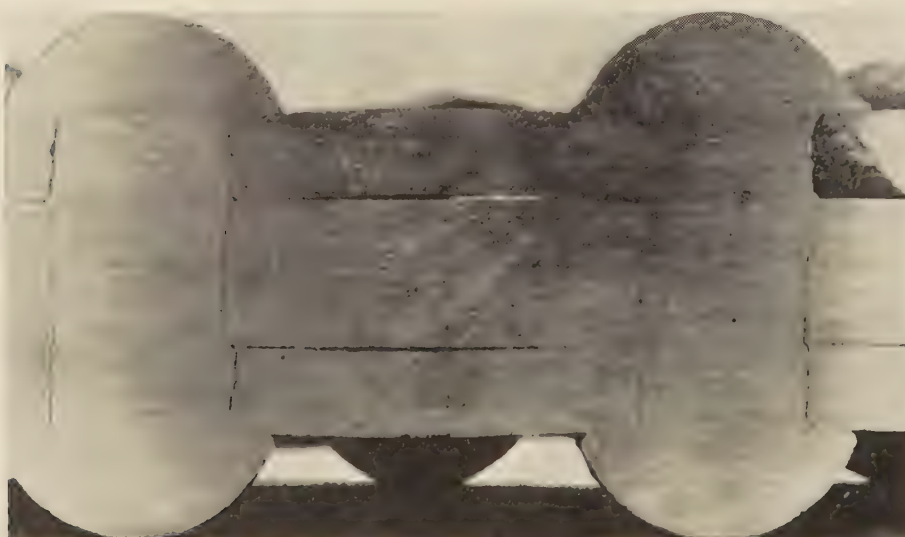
CROSS SECTION THROUGH LONGITUDINAL SEAM OF BOILER DRUM AT SECOND ROW OF RIVETS
